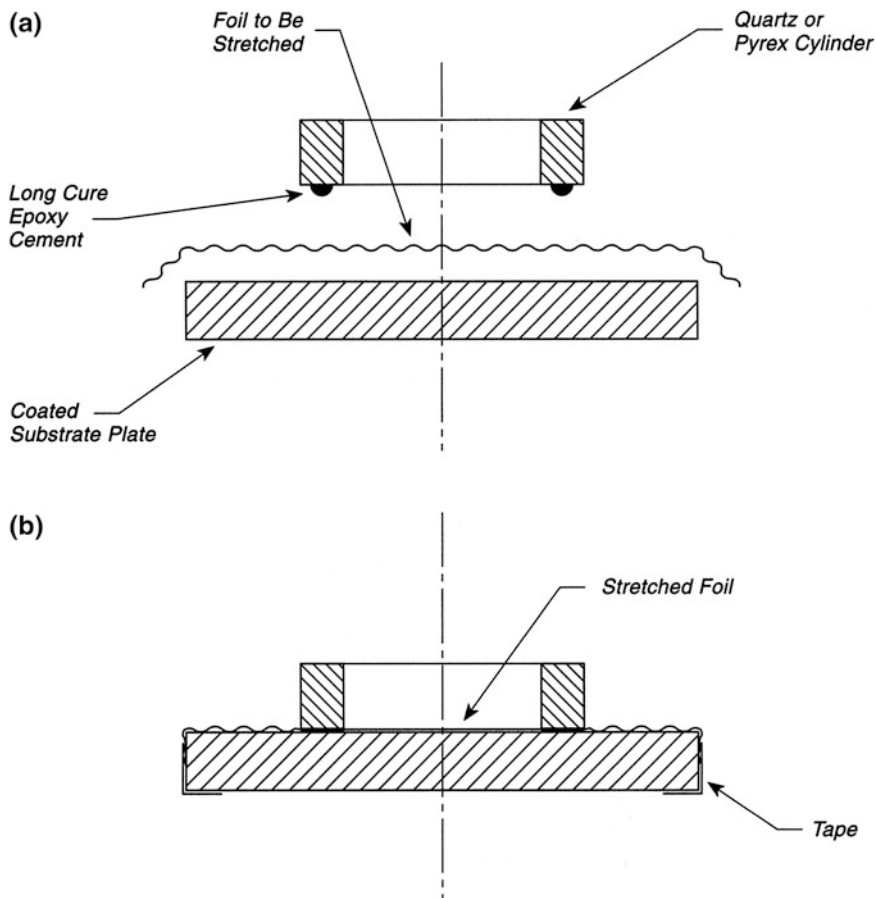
Stretching metal foils. a Before assembly. b After cure and cooling
